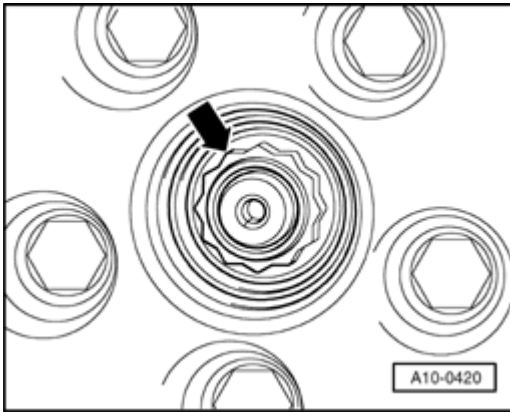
Loosening Right Side 12-Point Nut For Drive Axle
